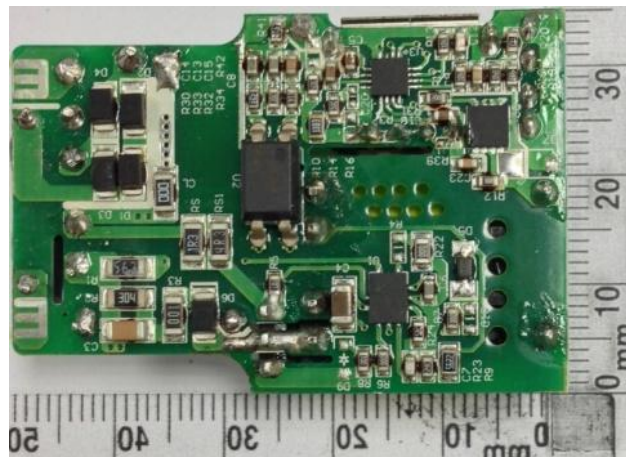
Bottom View (Dimension 45 x 32 [mm²])
